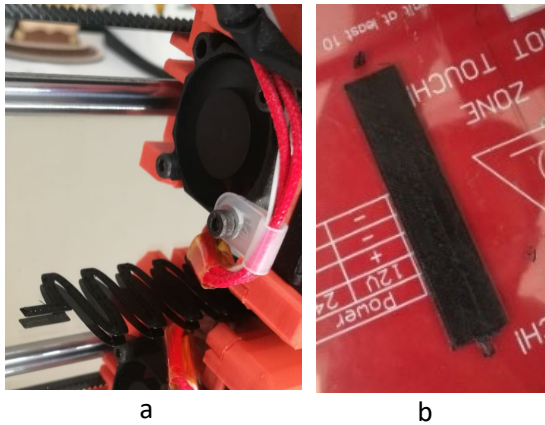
3D printed test specimens; a) S-shaped, b) rectangular
